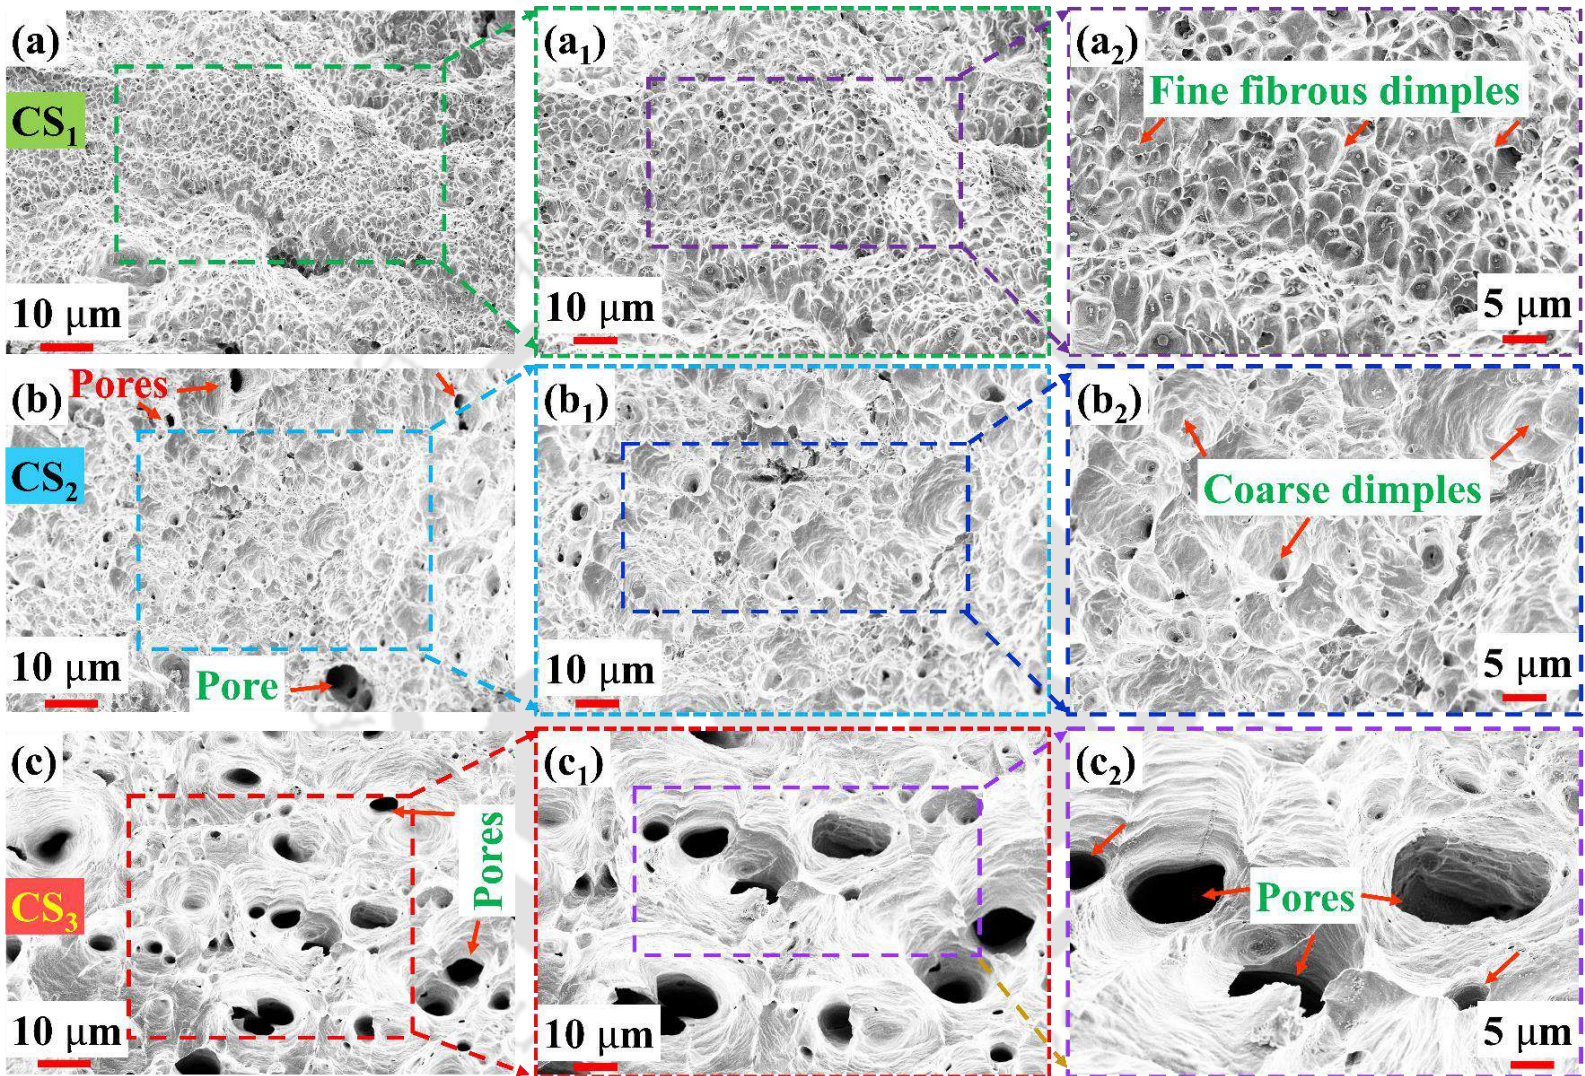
Micro-fractographs for the failed tensile specimens fabricated at (a-a₂) CS₁, (b-b₂) CS₂, and (c-c₂) CS₃ weld conditions.
